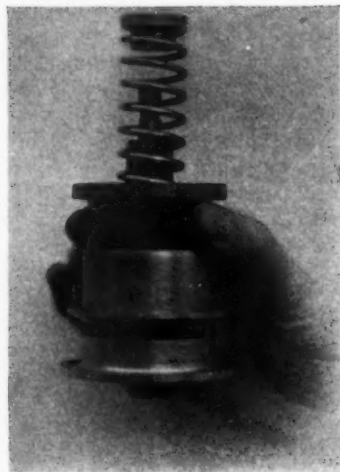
Combined Inlet and Exhaust Valve as Used on Esnault-Pelterie Seven-Cylinder Aeronautical Engine.
